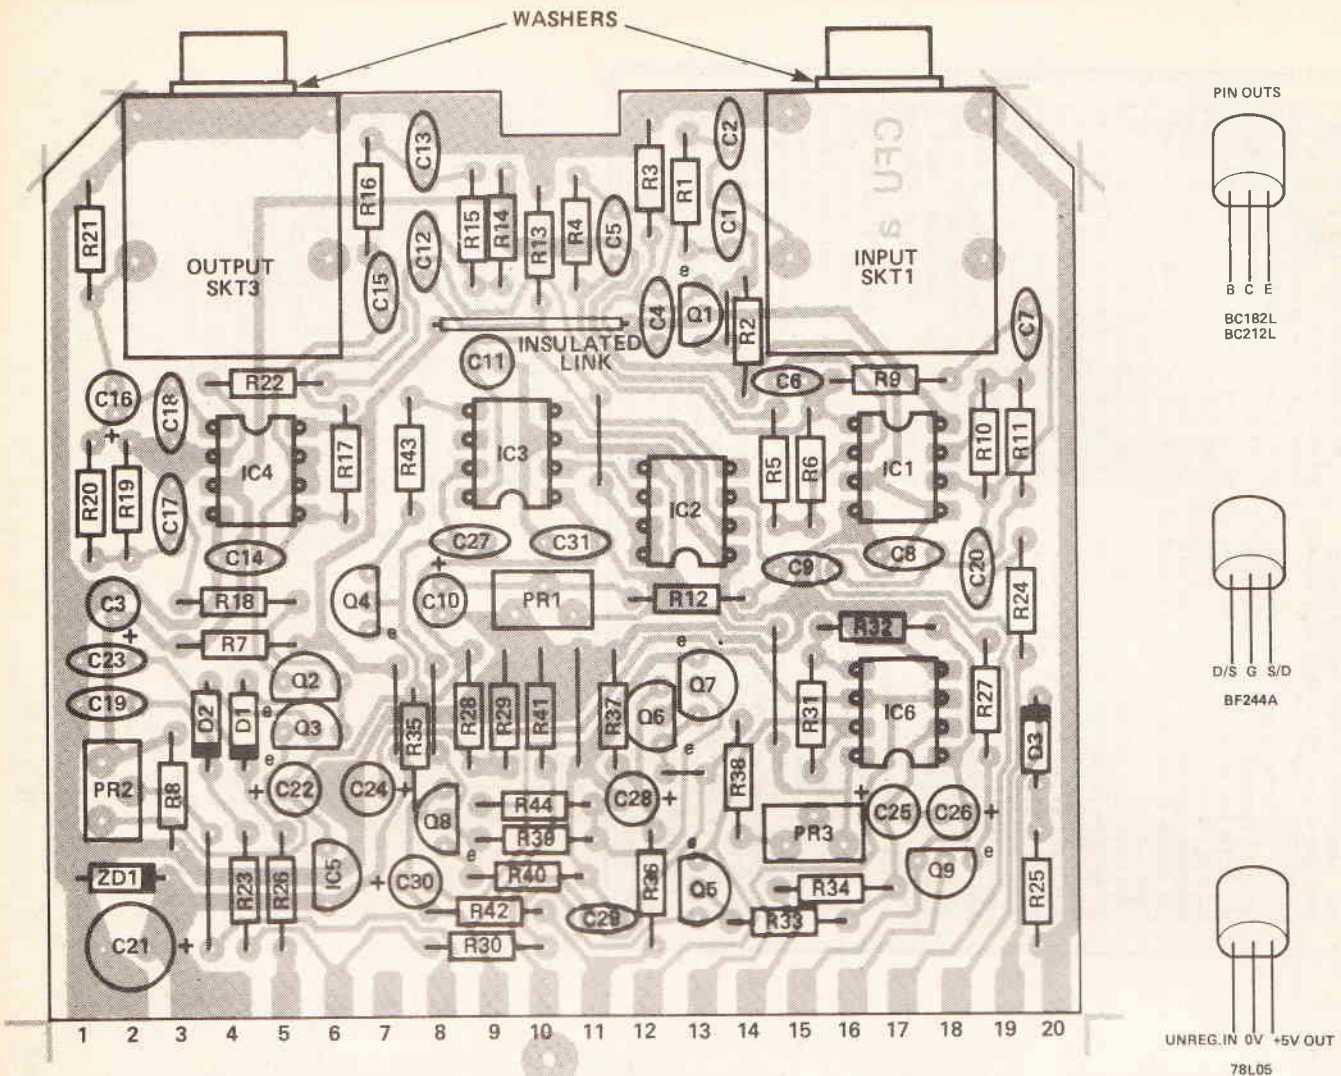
Overlay diagram of the PCB for the Chorus/Flanger
